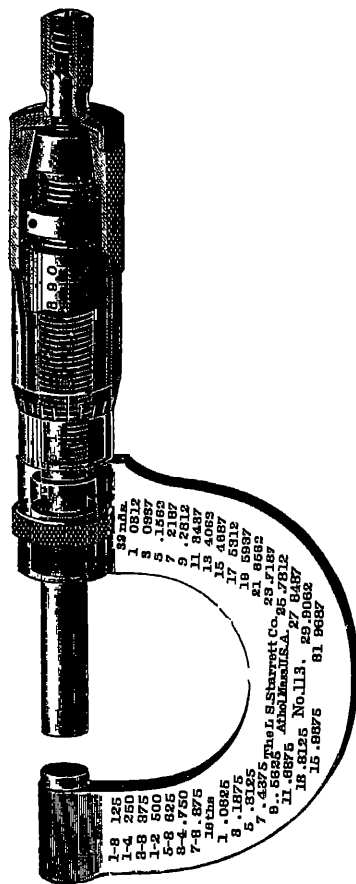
MICROMETER CALIPER READING TO 1000TH INCH.
